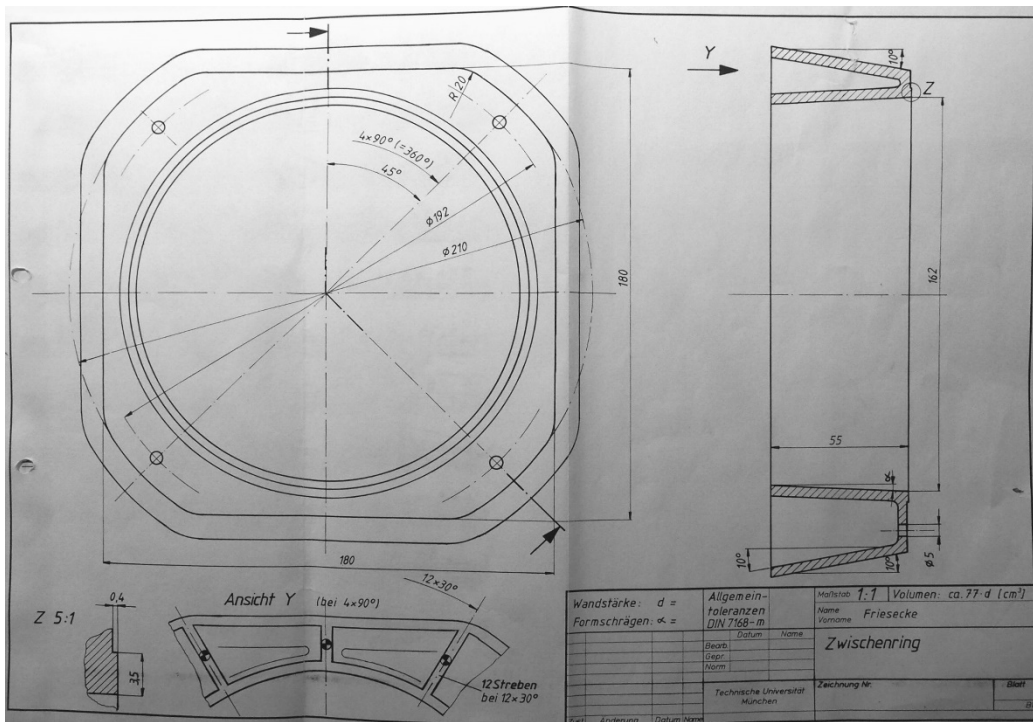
Technical drawing of the "Time Alignment Ring" for the injection moulding company (technical drawing by Falko Friesecke).
